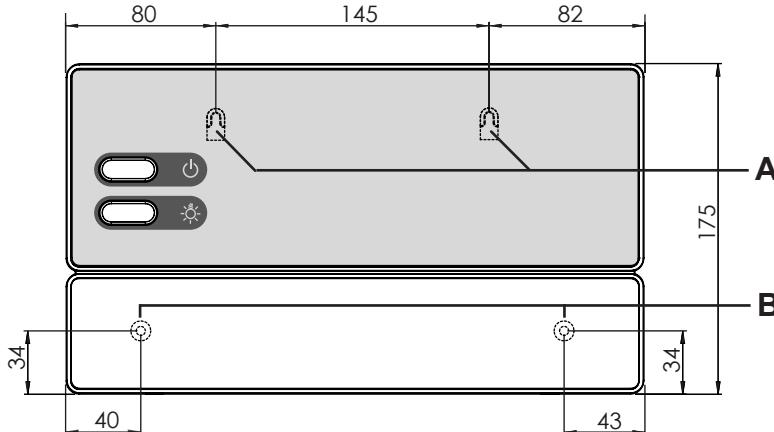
Position of the attachment device and the installation holes (dimensions in mm)
